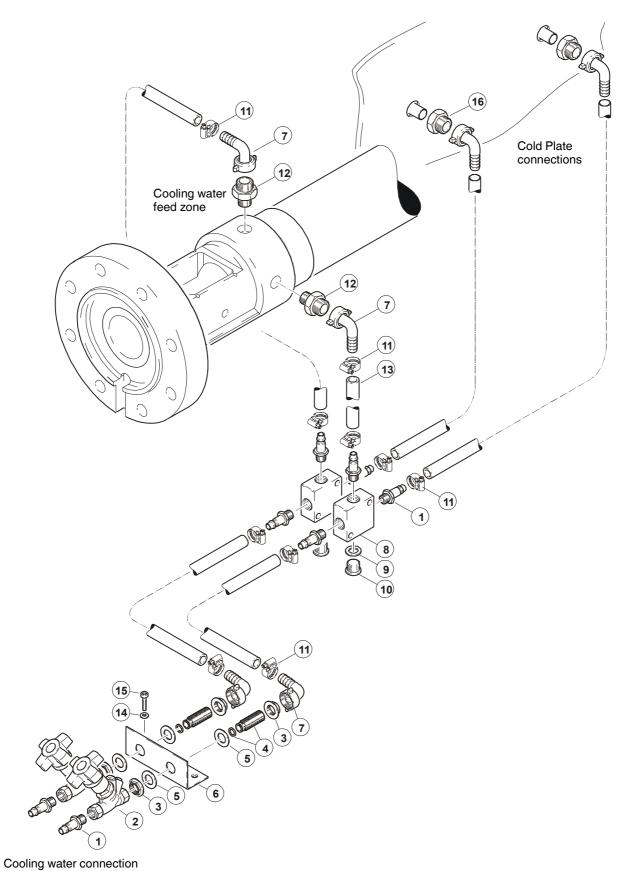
Example of foam extruder with Cold Plate cooling
